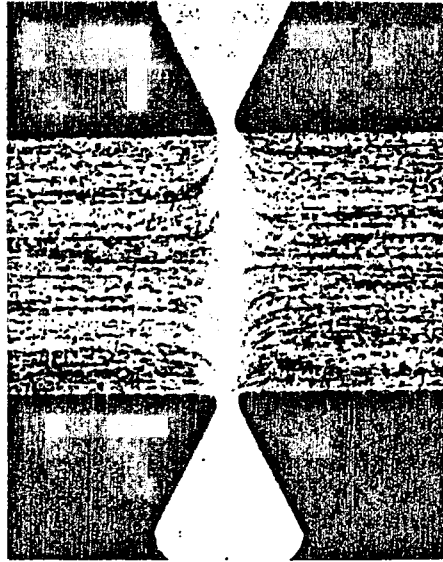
Single upset cold welding in type 1100 aluminum wire [7]
